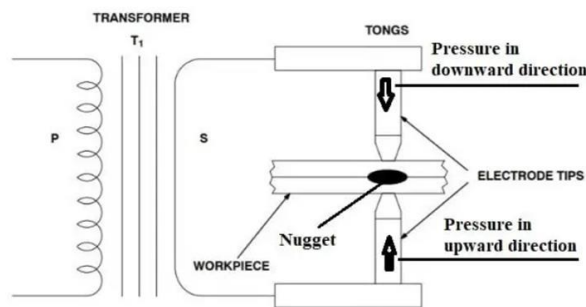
Construction Of A Resistance Spot Welding Machine
